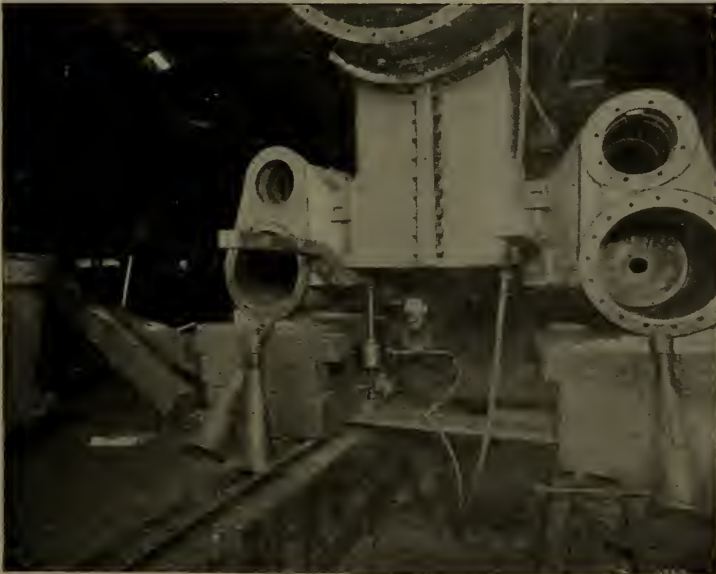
Drilling an otherwise inaccessible hole with a pneumatic drill.
